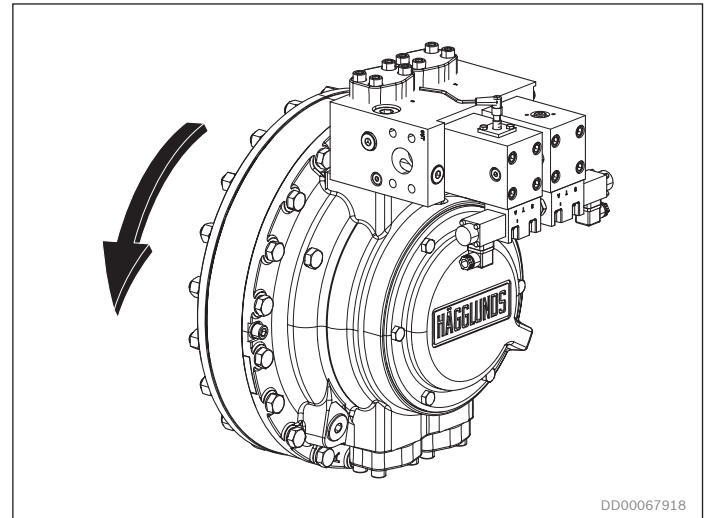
CA valve mounting position for clockwise drive shaft rotation as viewed from shaft motor side. INL (A1) port on valve connected to C port on motor
